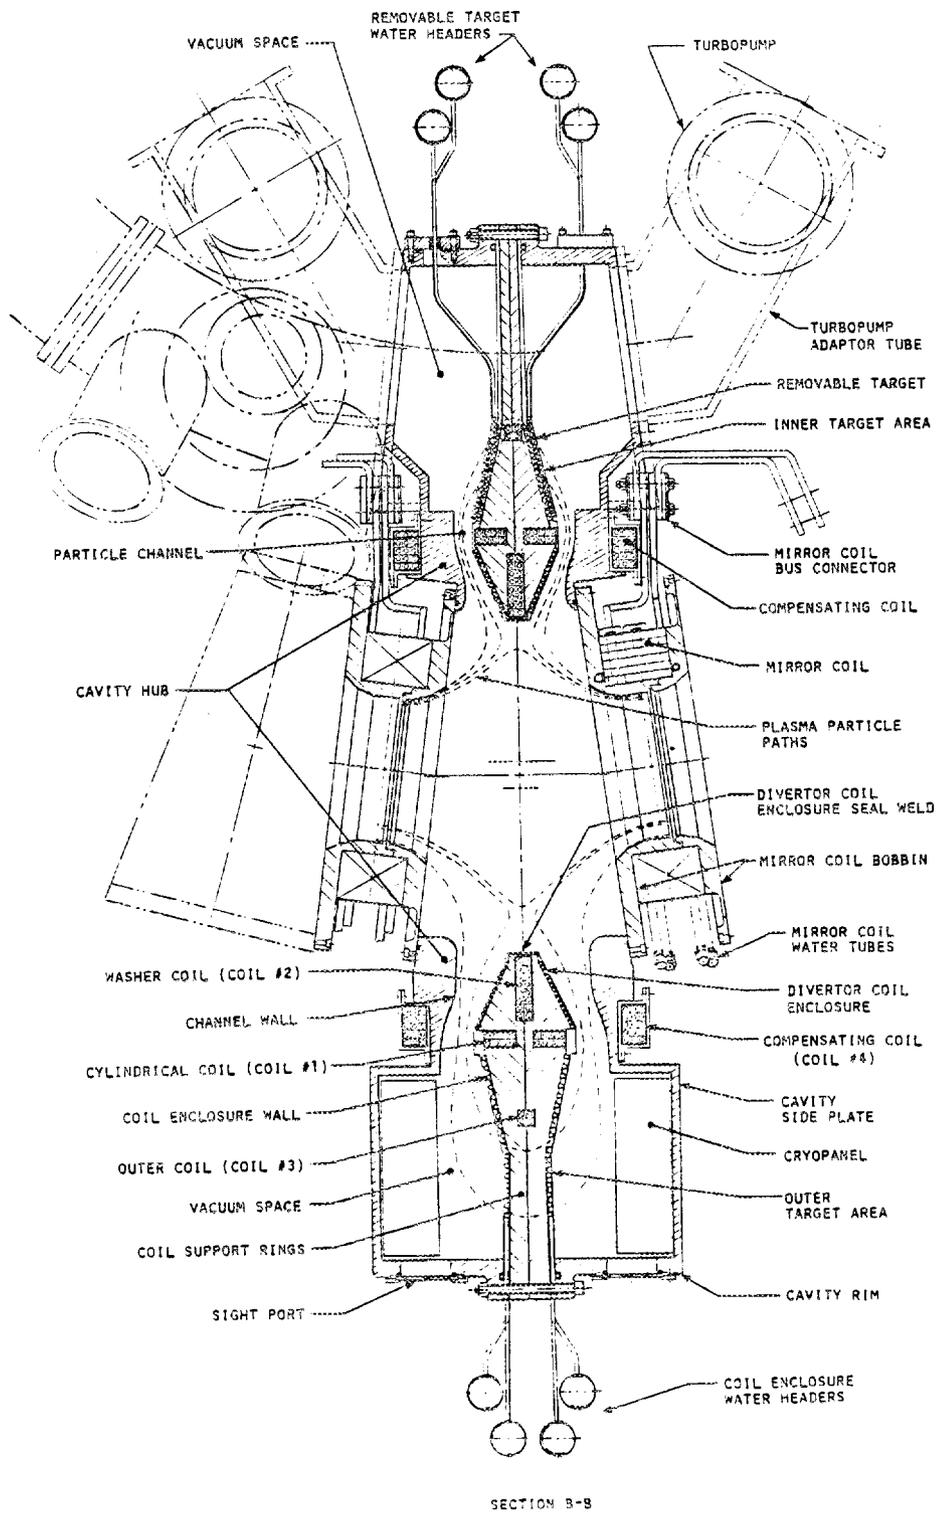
Horizontal Cross Section Through the Toroidal Divertor Assembly with Diverted Flux Lines Superimposed
